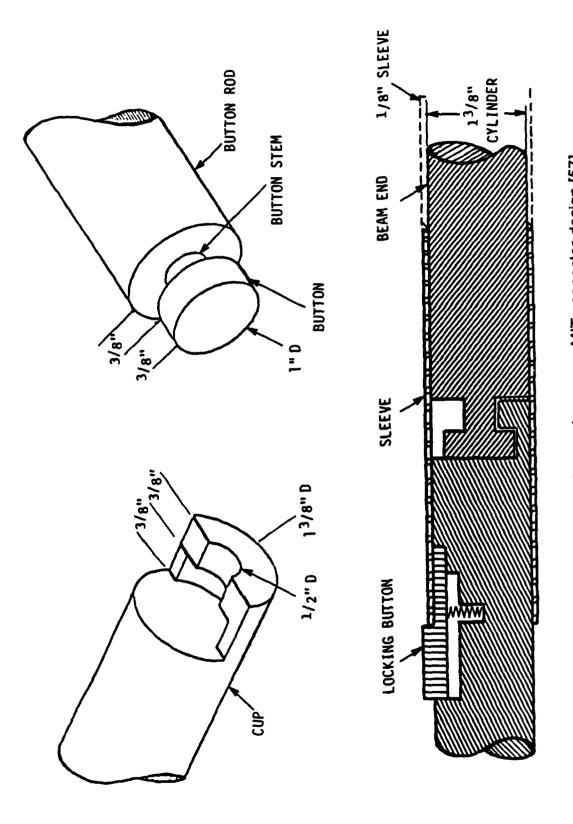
Prototype joint for use in space - MIT connector design [57]
